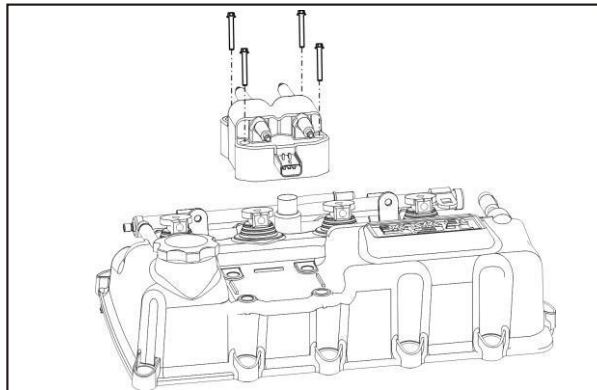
Removal of Ignition Coil (Tritec 1.6L)
